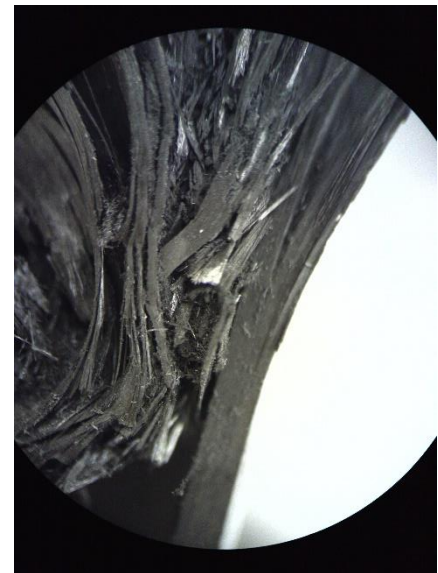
12 deg. loaded specimen. Peripheral section.
